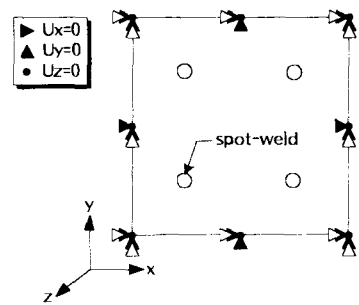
Boundary condition of a rectangular spot-welded plate
